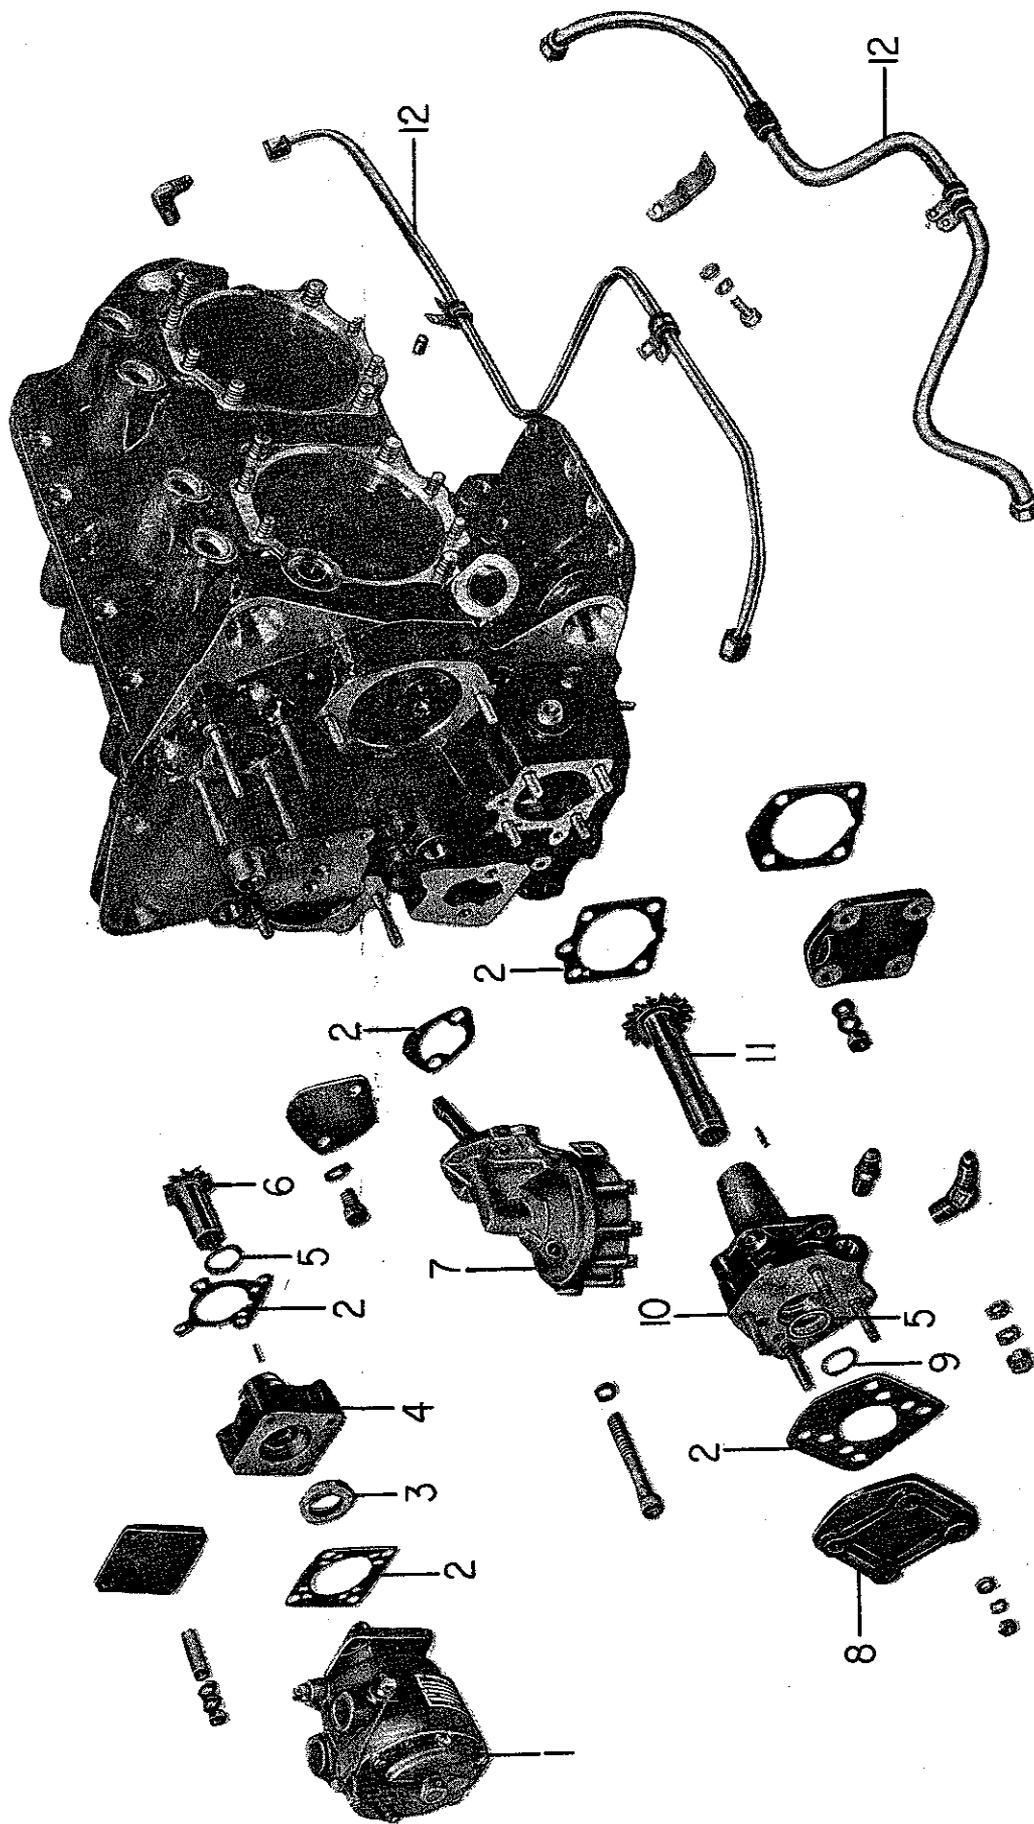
Oil Pressure Screen, Oil Cooler Bypass Valve and Full Flow Oil Filter
